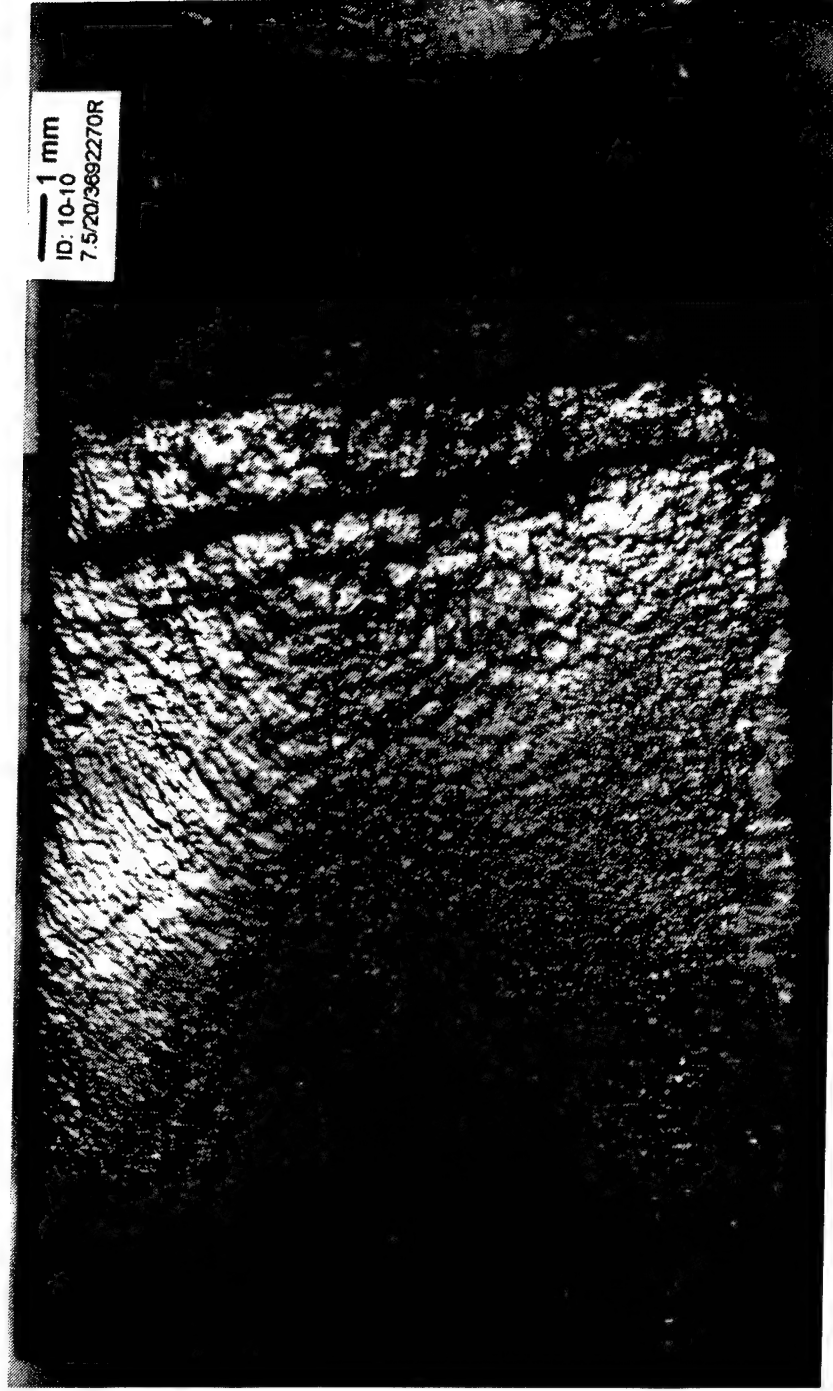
Fatigue fracture surface of the HSLA-80 but weld sample subjected to random loading:
